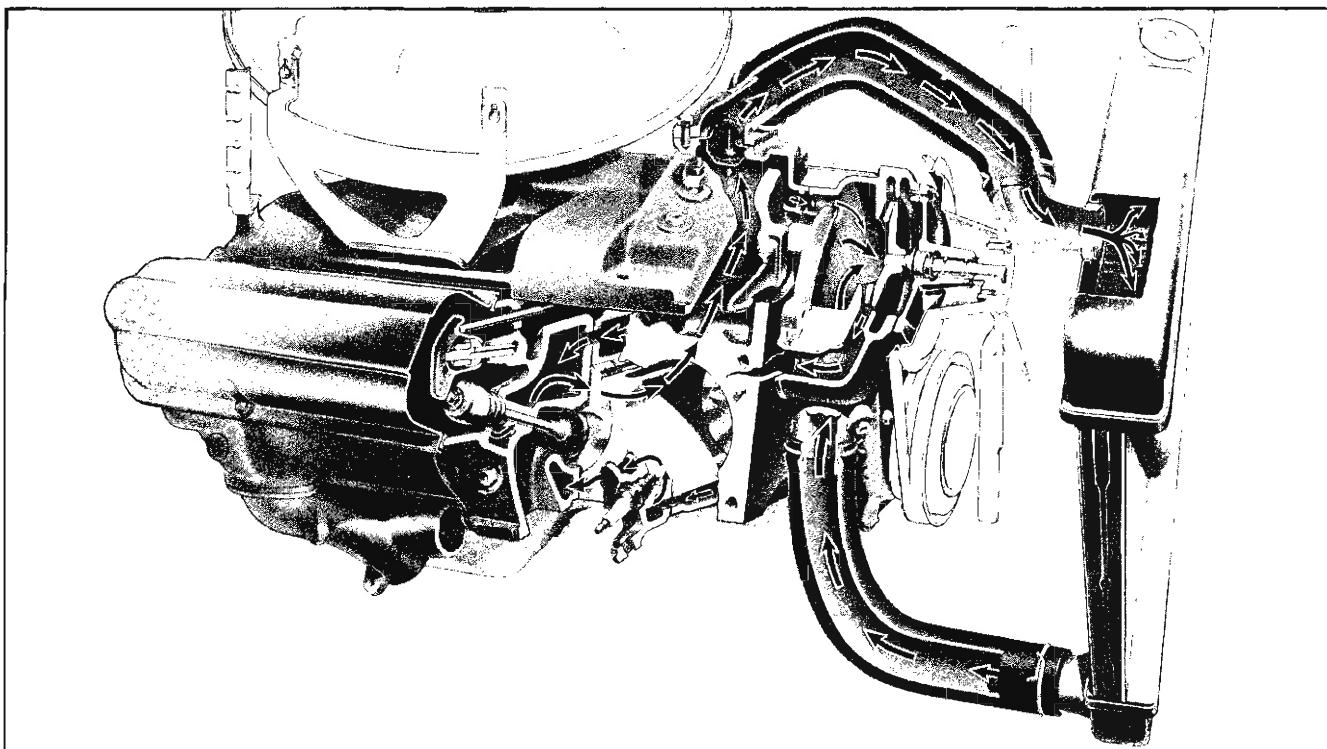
A-3 Cooling System Circulation—4 Cylinder Engine
